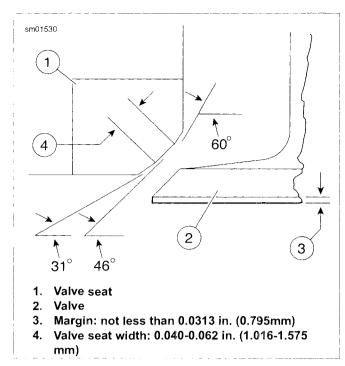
Intake and Exhaust Valve and Seat Dimensions
